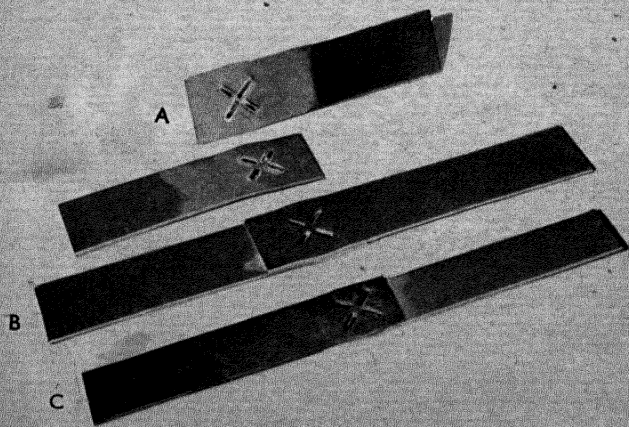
Strip-joints of aluminium (B) and aluminium to copper (C). (A) shows a typical tensile failure.
